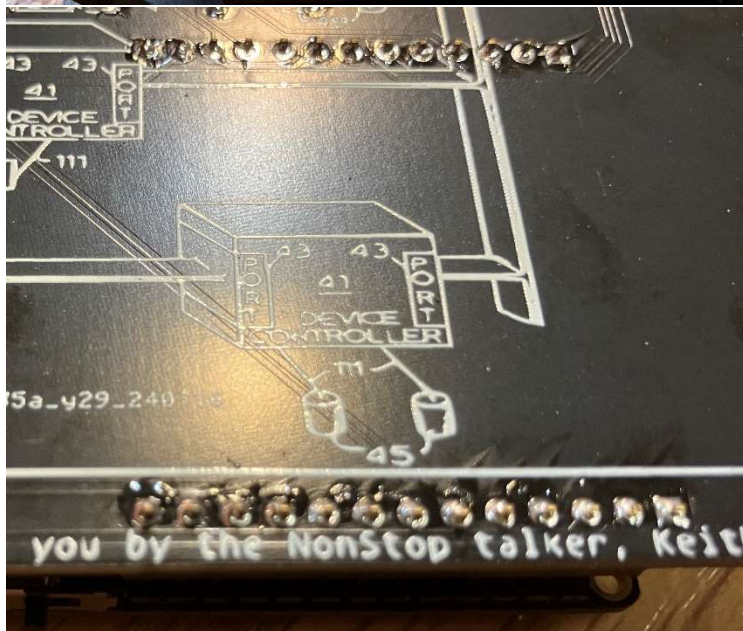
SOLDER BOTTOM PINS AFTER THE DISPLAY-SIDE PINS ARE SOLDERED
